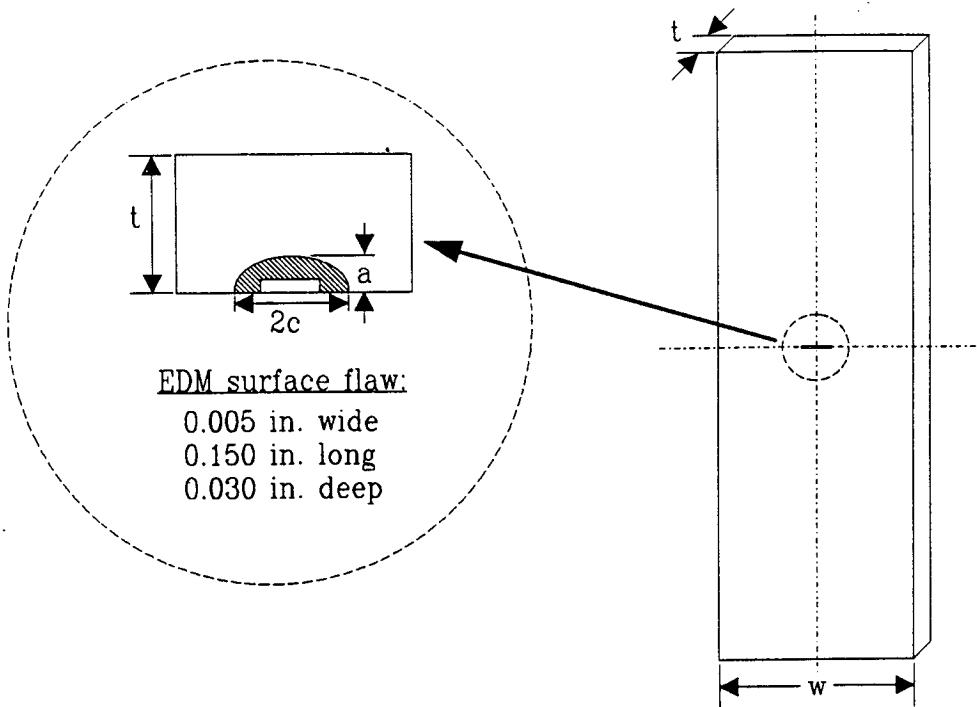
Schematic diagram of the PS(T) specimen geometry, indicating the dimensions of the EDM notch and definitions of the crack depth,  $a$ , and half crack length,  $c$ . See table 2 for a listing of  $w$  and  $t$  values tested.
